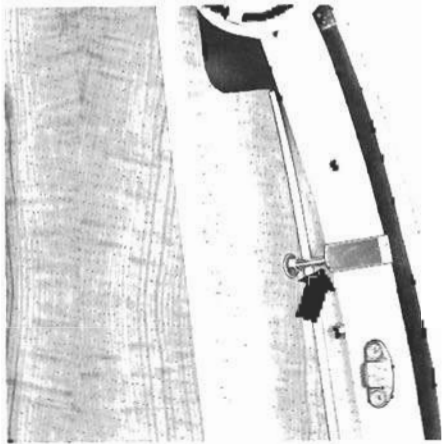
Position of rear bracket (arrow) on closet and on body rear side panel. The luggage compartment lid must be opened for access.
